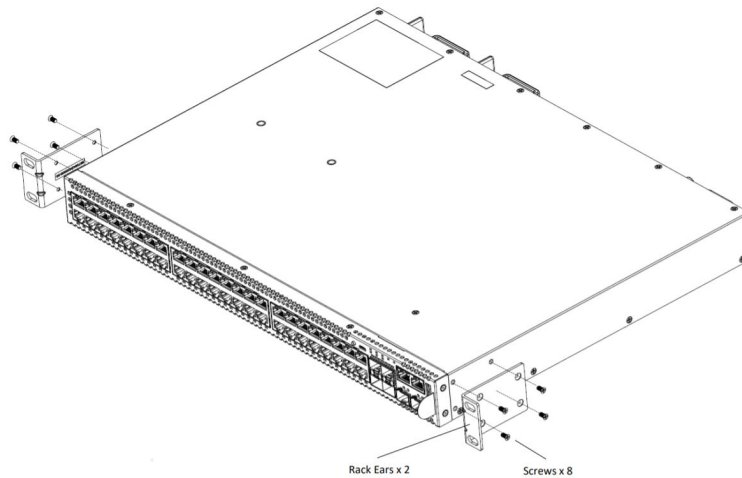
Flush-Mount: Attaching Short Mounting Brackets
